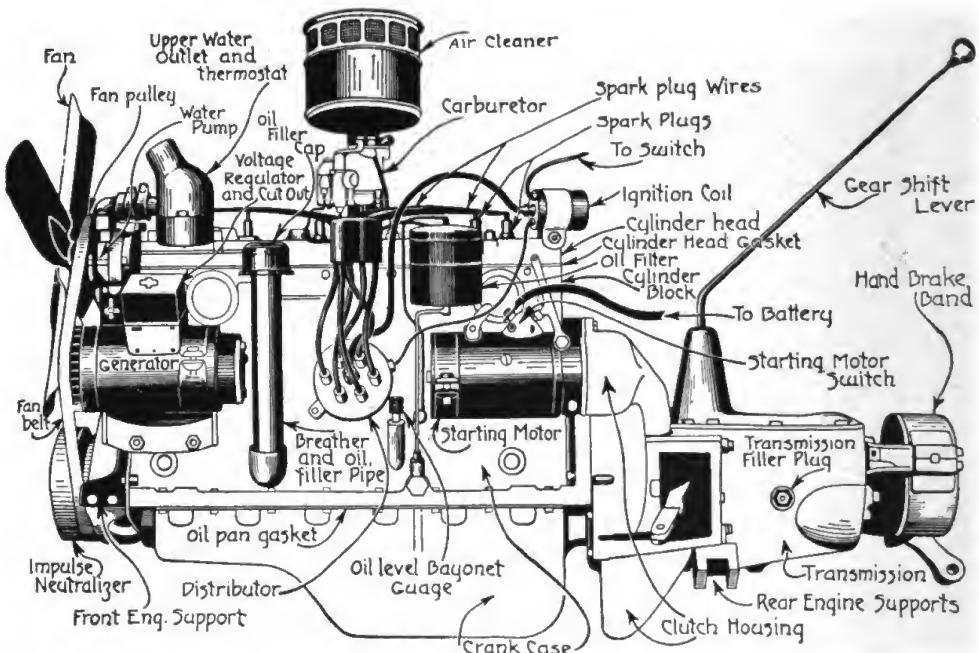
Typical engine and transmission assembly showing external parts, equipment and accessories.
